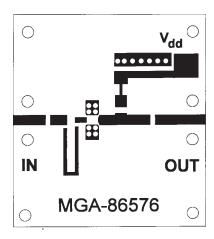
Layout for MGA-86576 Demonstration Amplifier. PCB dimensions are 1.18 inches wide by 1.30 inches high.
